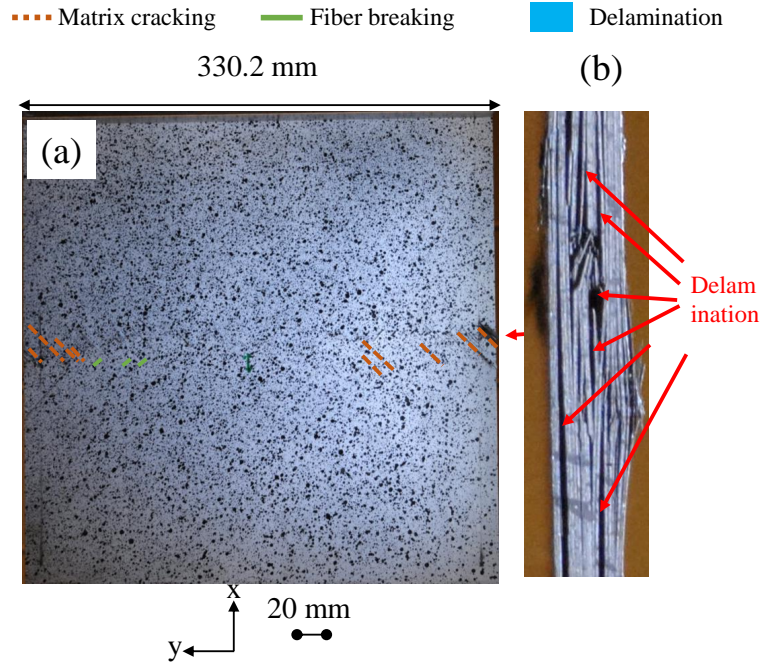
Surface inspections of the CAI-induced damage of an L1-L-48 sample: (a) non-impacted surface, and (b) left side view.
